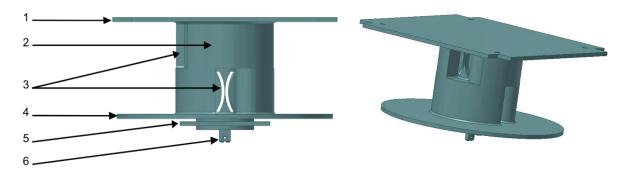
One of the deorbit system reel variants. 1) top plate (cover), 2) reel, 3) holes for flat springs, 4) bottom plate, 5) conical spring mount, 6) ear for sail release mechanism
